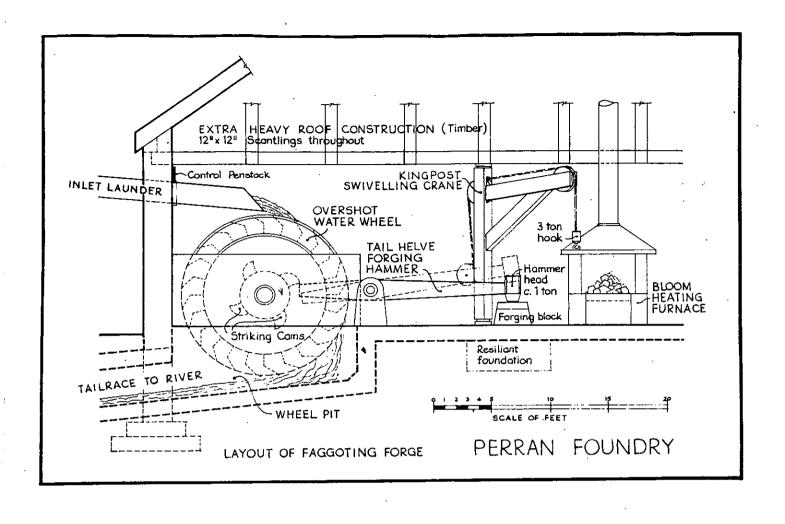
Perran foundry: layout of faggoting forge, drawn by T. Bradley, 1980
